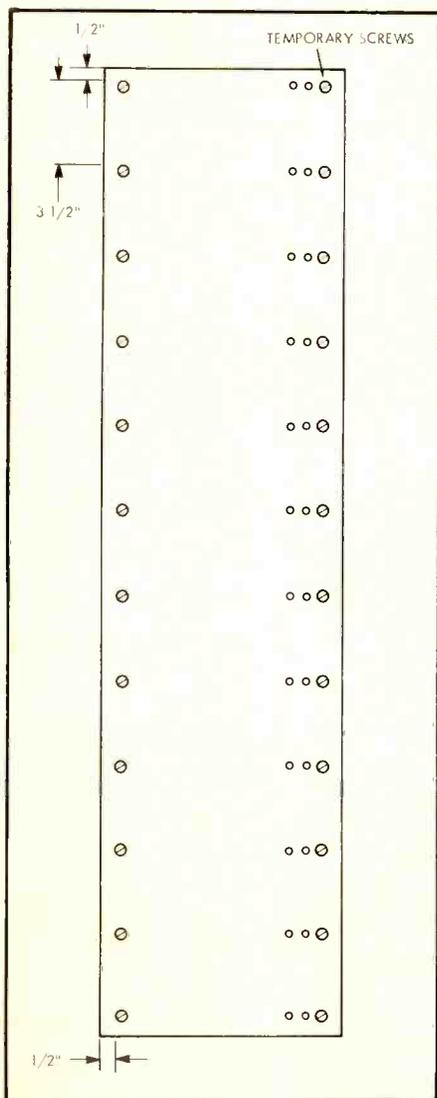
Layout of mounting holes. Drill holes through electrodes two rows at a time and then use temporary screws to hold new row down.
